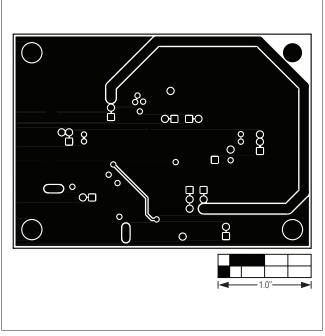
MAX14566E EV Kit PCB Layout—Solder Side
